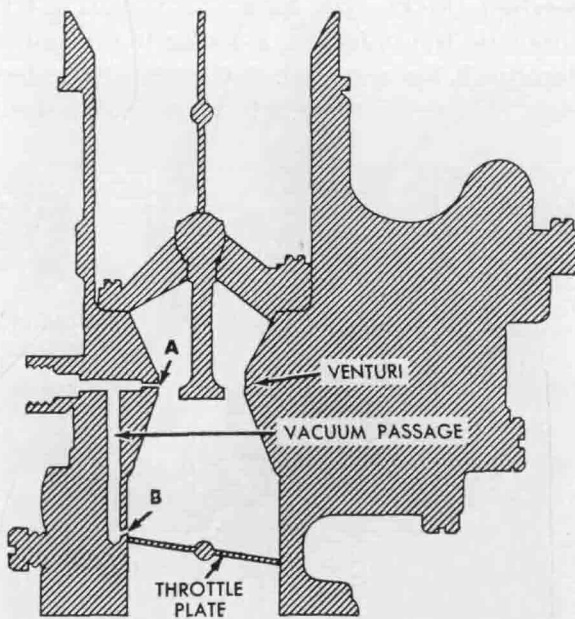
Sectional view of carburetor used with full-vacuum-control distributor showing vacuum passage and points, A and B, at which vacuum is obtained. (Ford Motor Company)
